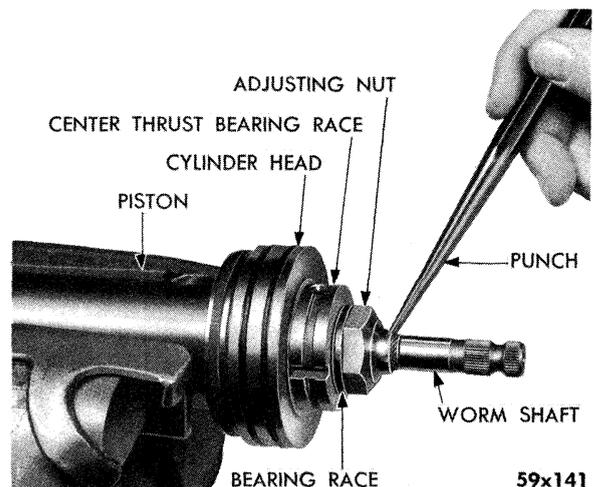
Staking Worm Shaft Bearing Adjusting Nut
